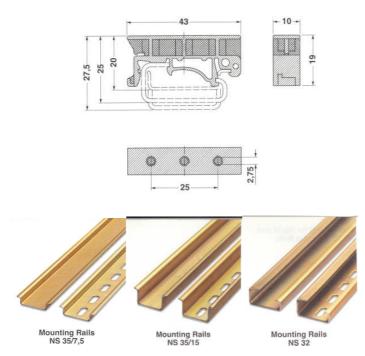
Dimension of DIN Rail mount kit and applicable DIN Rails
